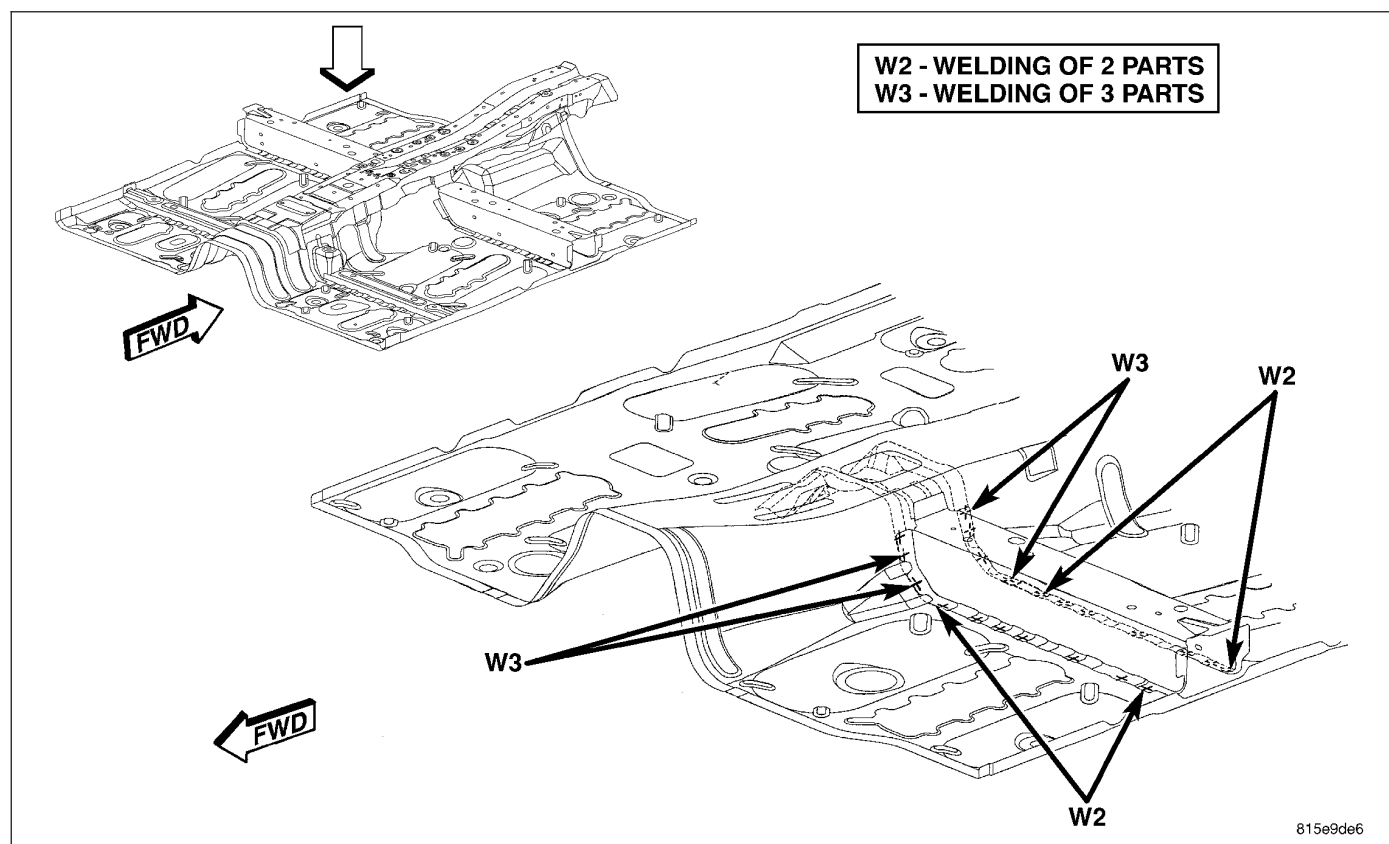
FRONT FLOOR ASSEMBLY (4 OF 4)
